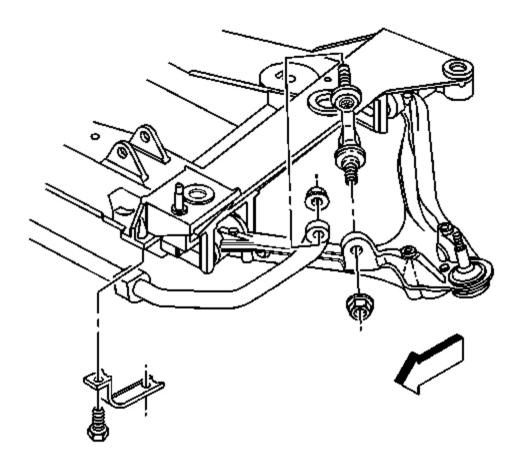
Stabilizer Shaft Insulator Clamps, Stabilizer Shaft Link & Nuts Courtesy of GENERAL MOTORS CORP.
